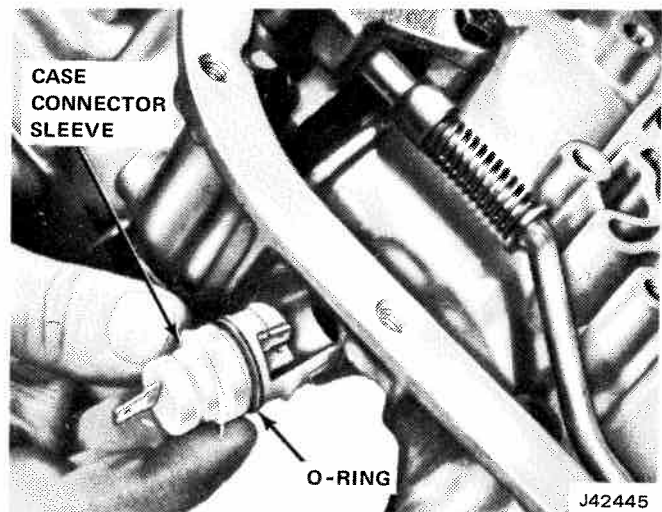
Removing-Installing Case Connector Sleeve and O-Ring Seal
